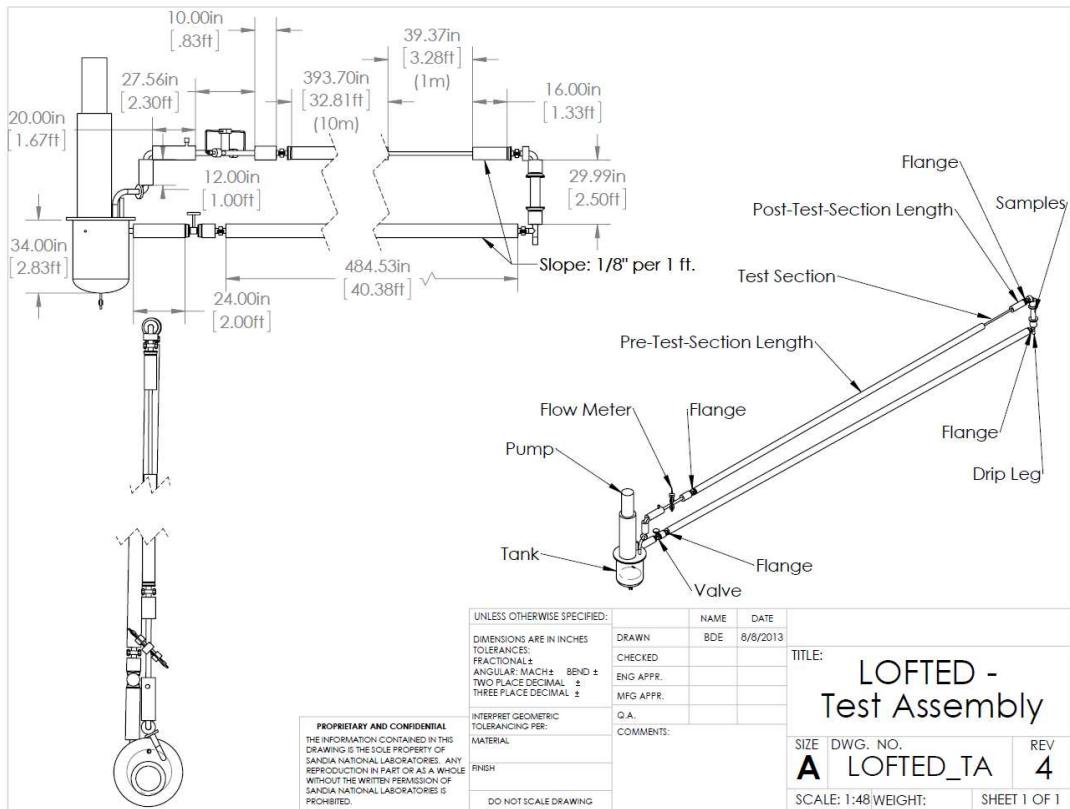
Salt Thermal Stability Experiment Equipment Arrangement
